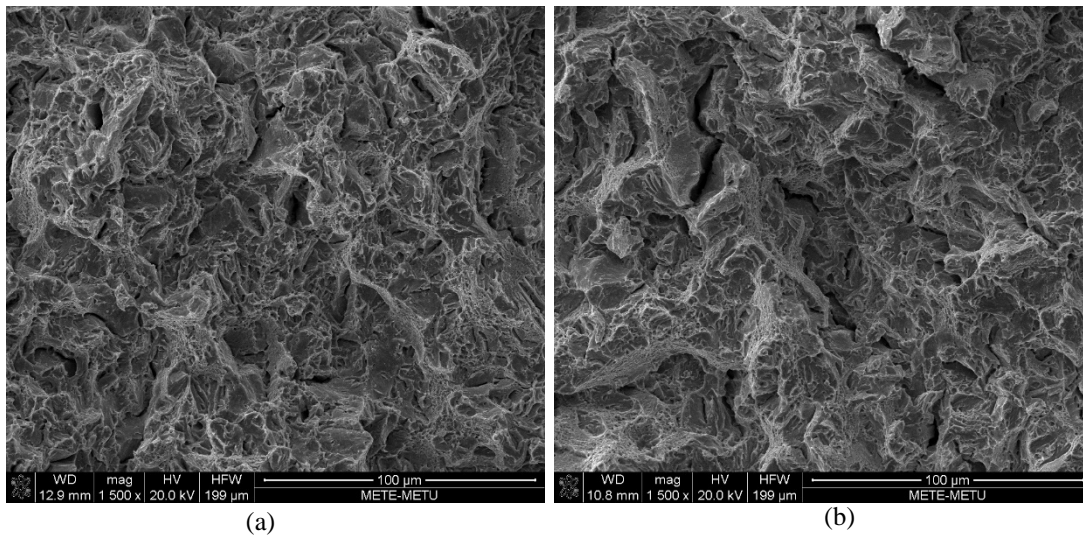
Fracture surfaces of the tensile test specimens of lower bainite transformed 270°C, 80min.
